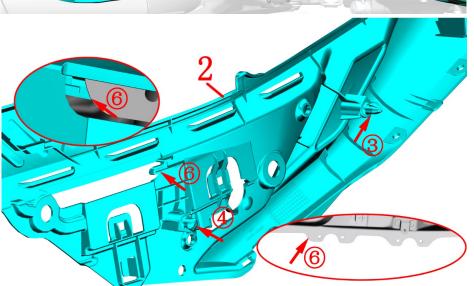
SIDE COVER		Side cover component 4	CHK	Q
